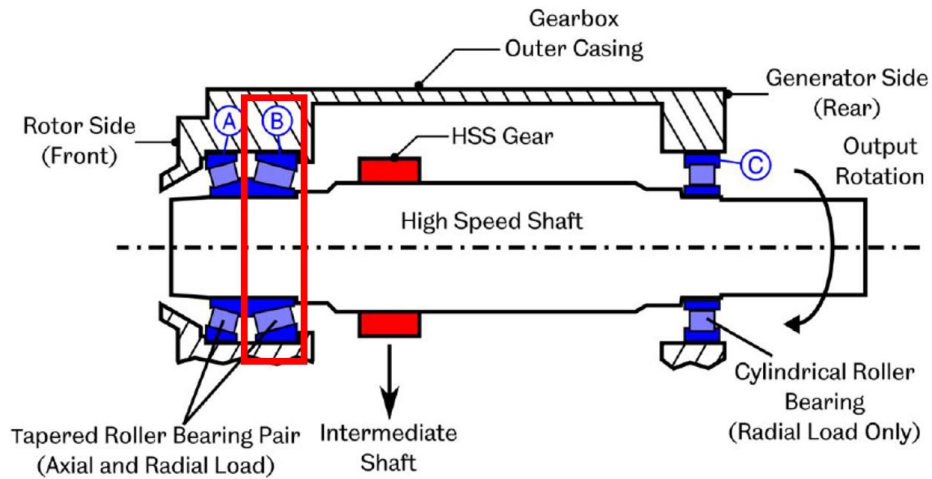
HSS bearing configuration for instrumented Vestas V42 wind turbine. The instrumented turbine was bearing B. From [39].
